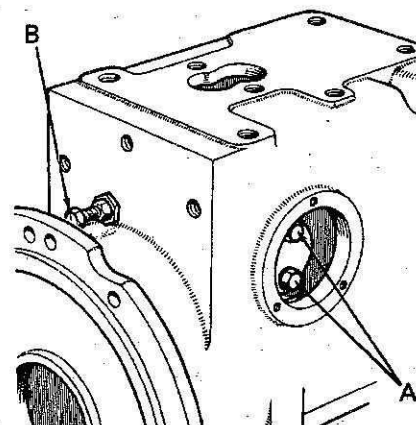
To remove control valve assembly, unbolt pressure line at (A) and unscrew lubrication line retaining set screw (B) 9 turns.
